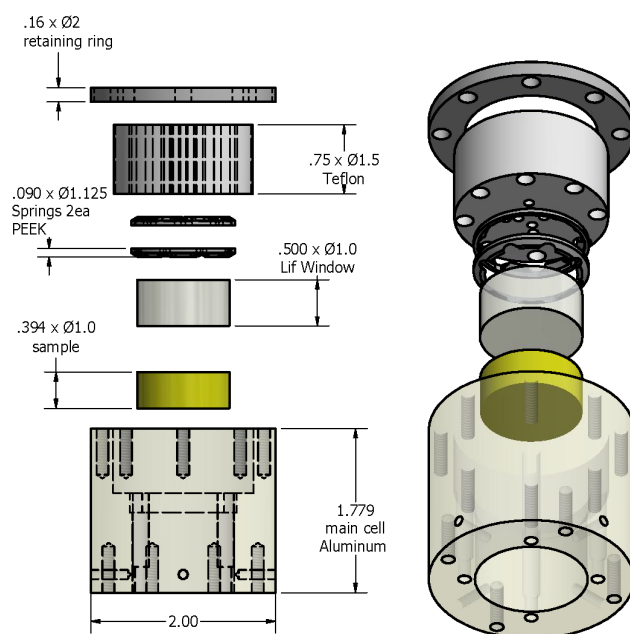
An exploded schematic of the heated target presented here. The buffer plate, which would also act as the impact surface, is not shown.
